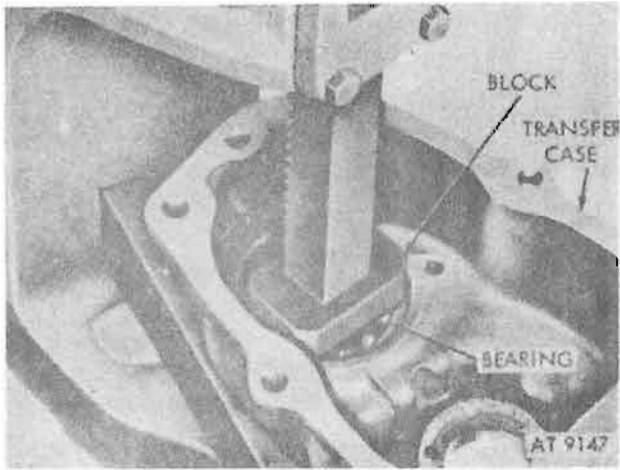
Pressing output shaft rear bearing from transfer case.
